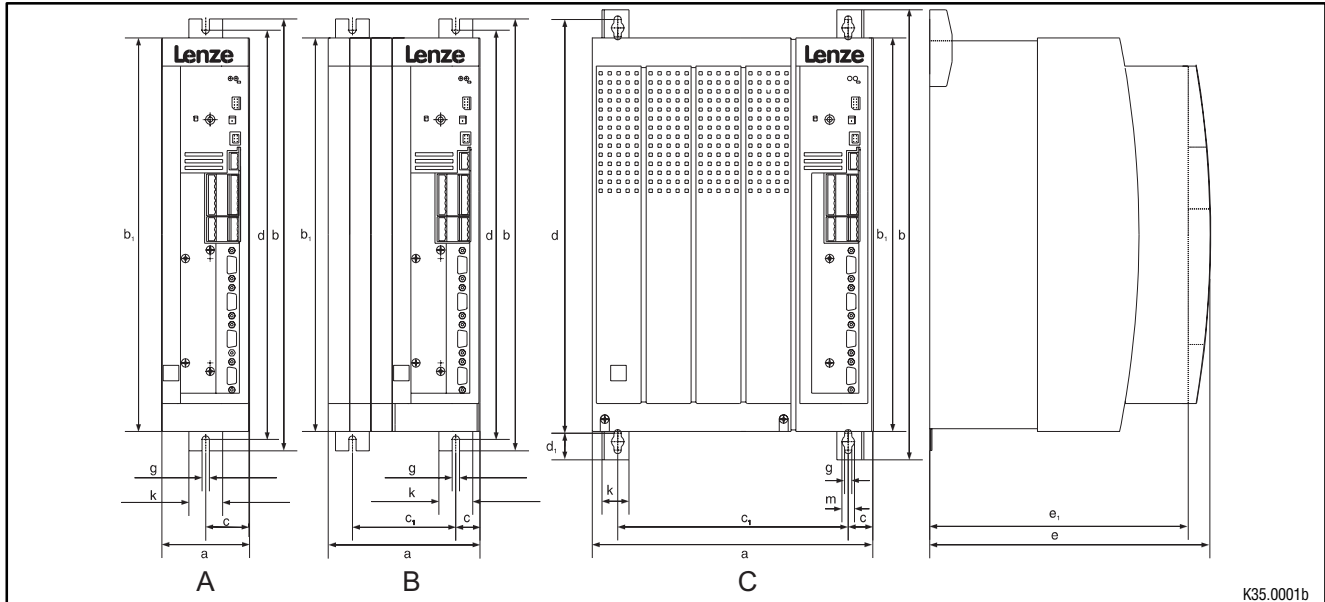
Dimensions for assembly with fixing rails/fixing brackets
